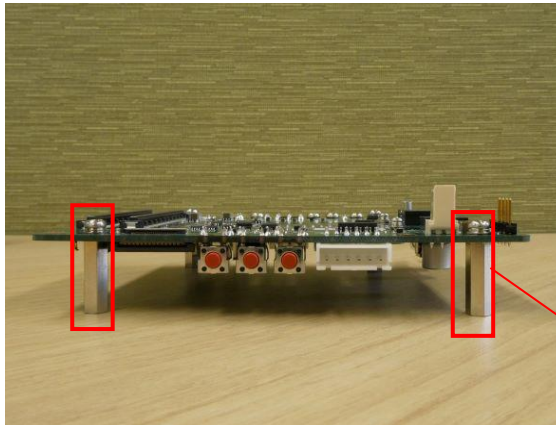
tighten in four places with the included M2.6 spacers and M2.6 pan head screws
